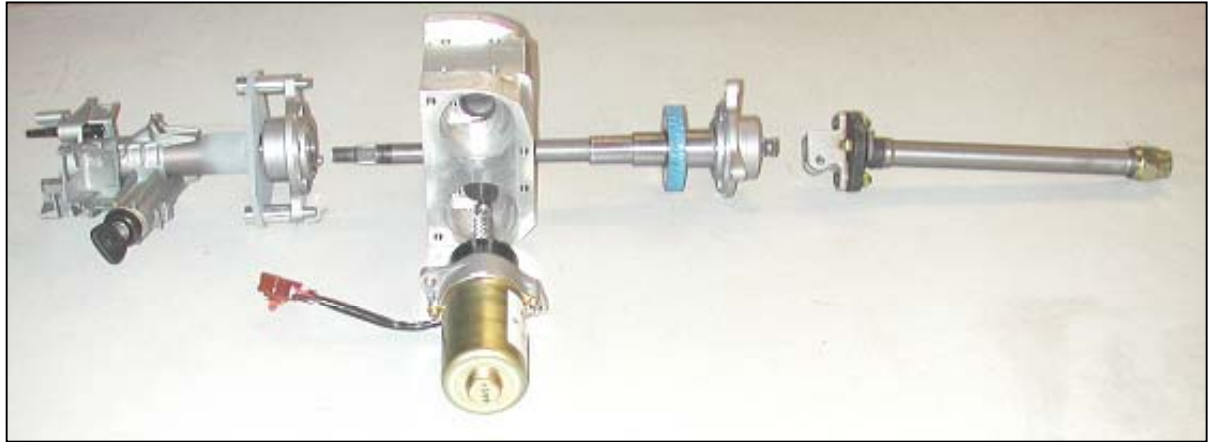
The steering column assembly is affixed to the gearbox casing together with the left end plate. In the middle, steering shaft with press-fitted sheath for the bearing seats and worm wheel
